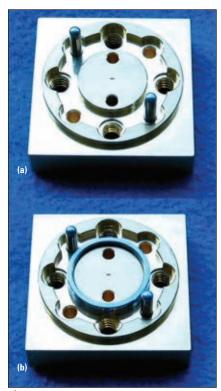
Ring-centered waveguide flange: (a) with dowel holes and pins and (b) with the coupling ring in place.
